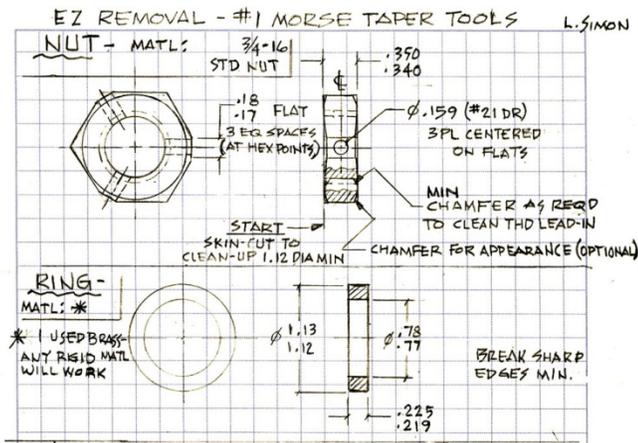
shows a dimensioned plan. See Page 3 for a larger version.
